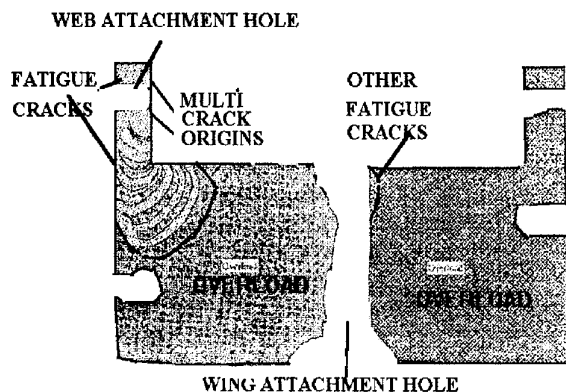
Cross section view of failure surfaces in the Macchi spar.
